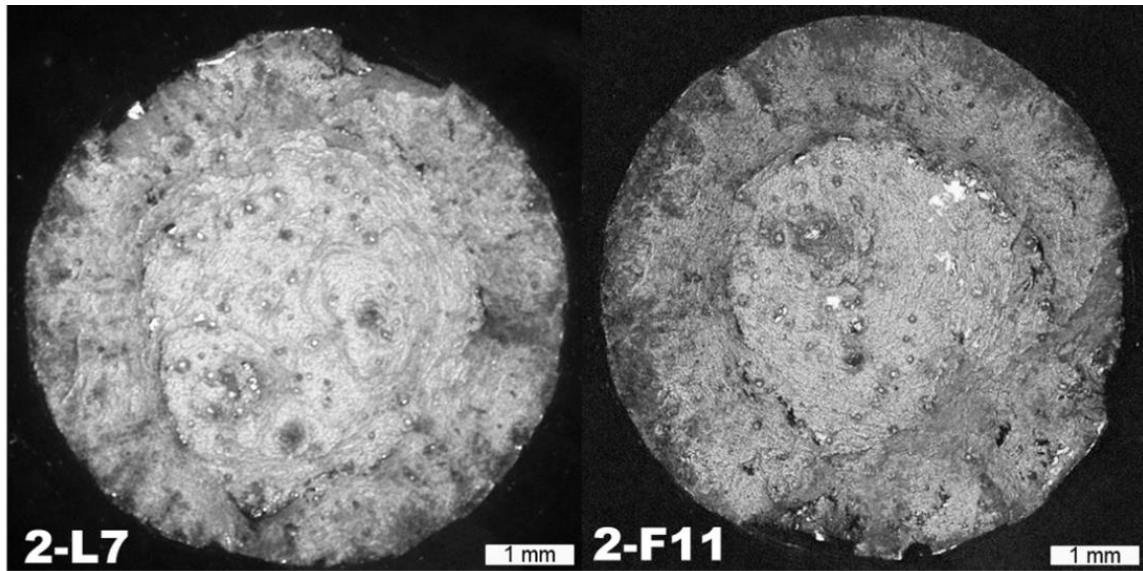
Fracture surfaces of Samples 2-L7 & 2-F11
